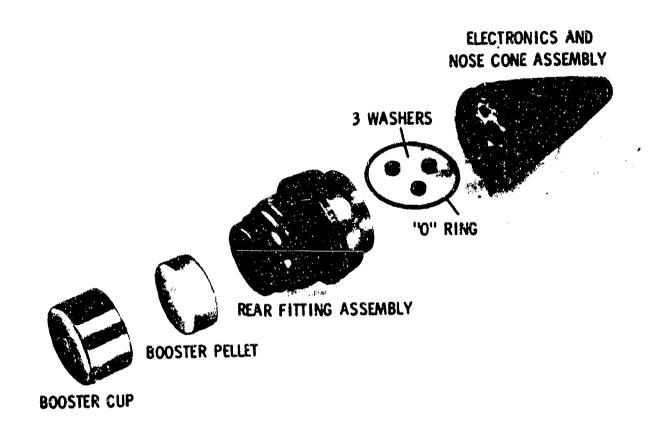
Exploded view of XM587E2 Electronic Fuze.
